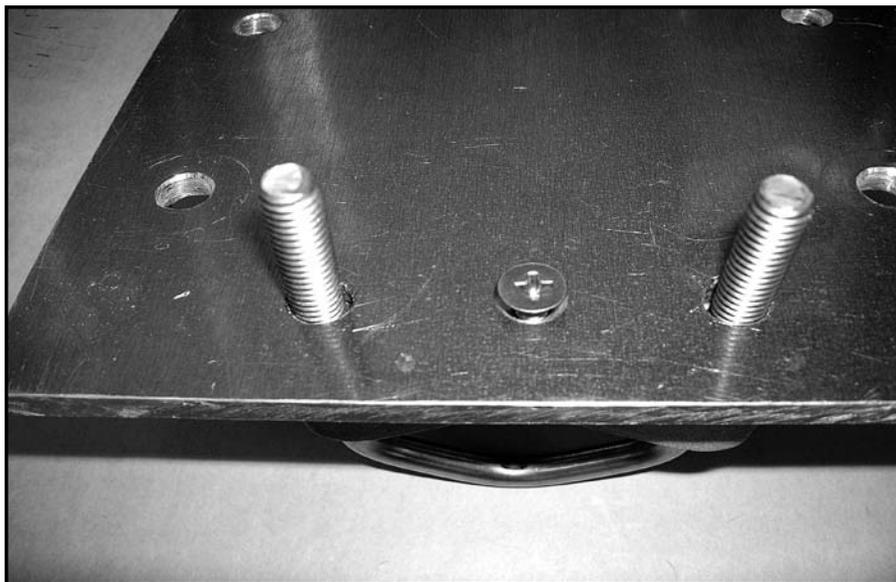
A closeup of the V saddle clamp assembly: Note the countersunk Phillips-head bolt that secures the V saddle.
